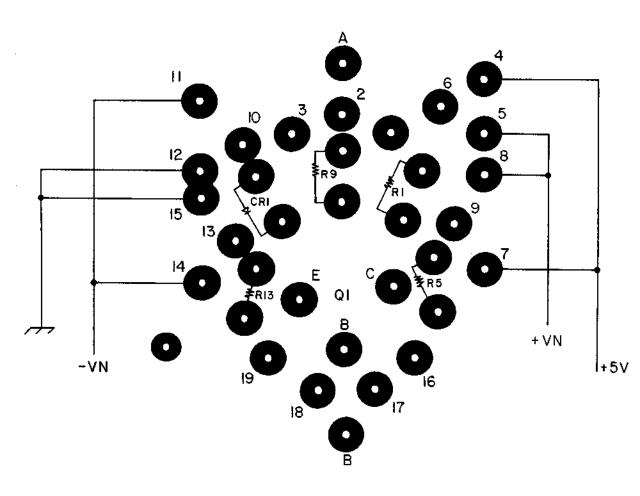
I/O BUFFERS, PC LAYOUT BLOW-UP
